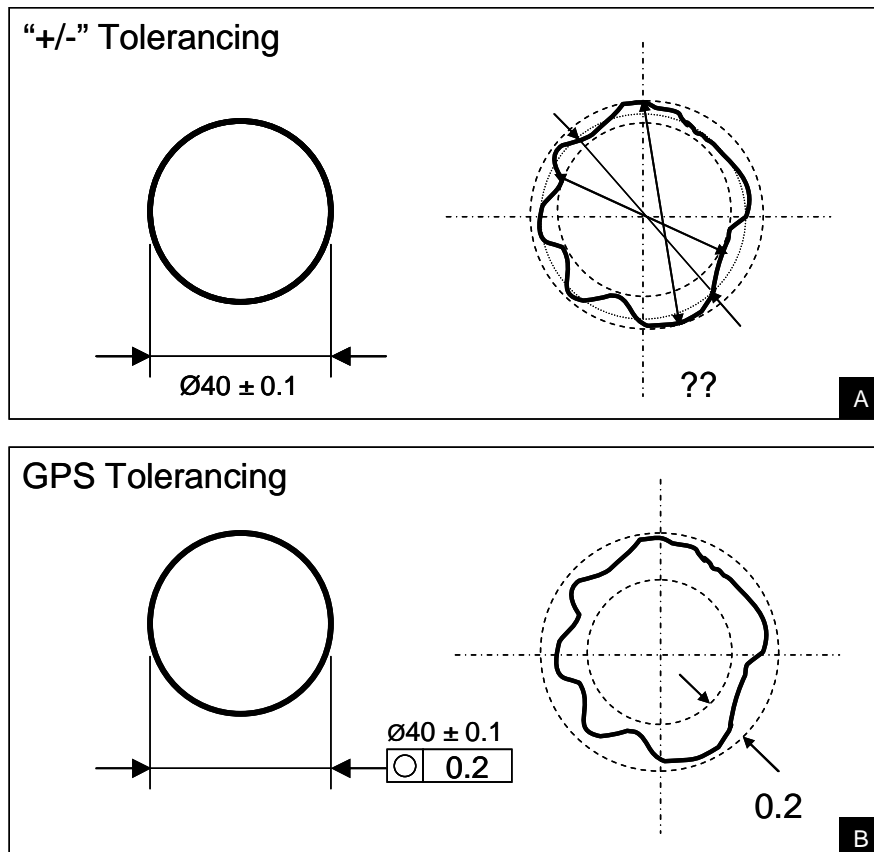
A) "+/-" Tolerancing is ambiguous. B) GPS Tolerancing is much clearer.
